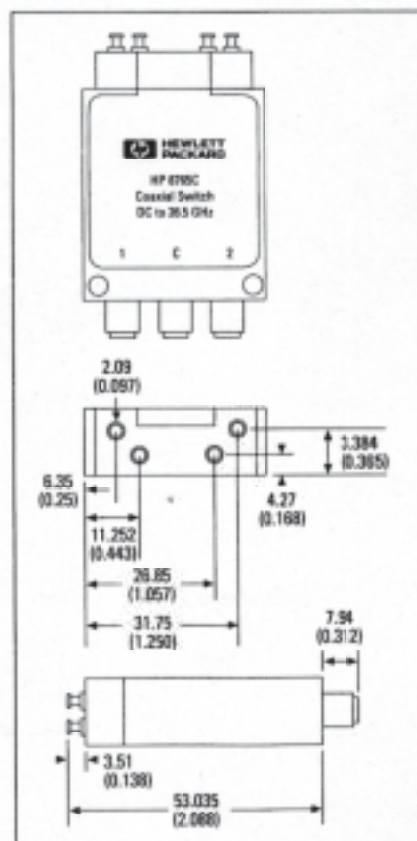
Option 100 with solder terminals part dimensions in millimeters and (inches).
